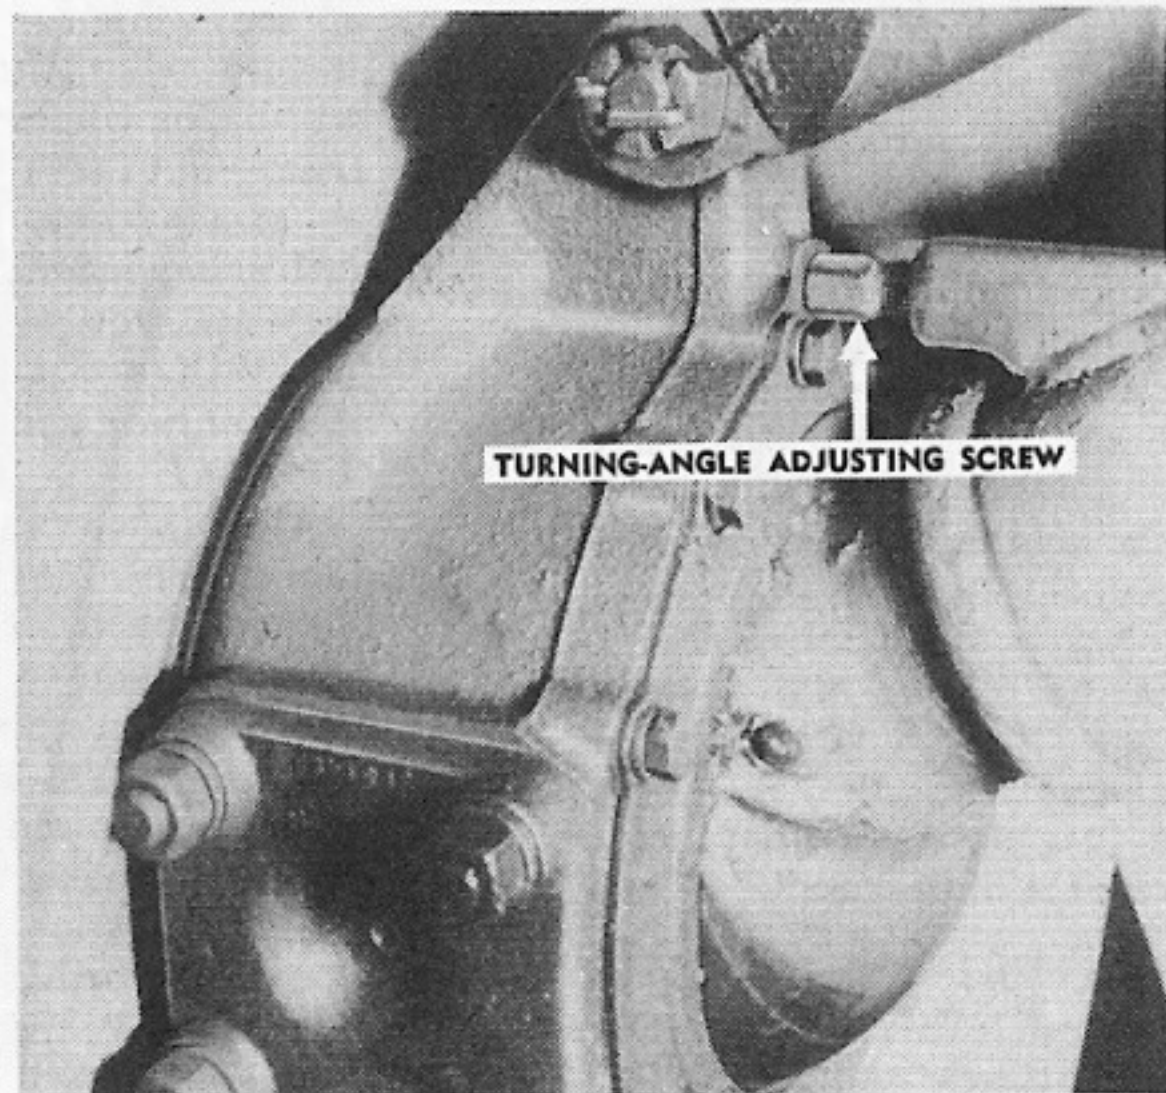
If turning-angle adjusting screws get out of line, the worm nut'll slide too far.
